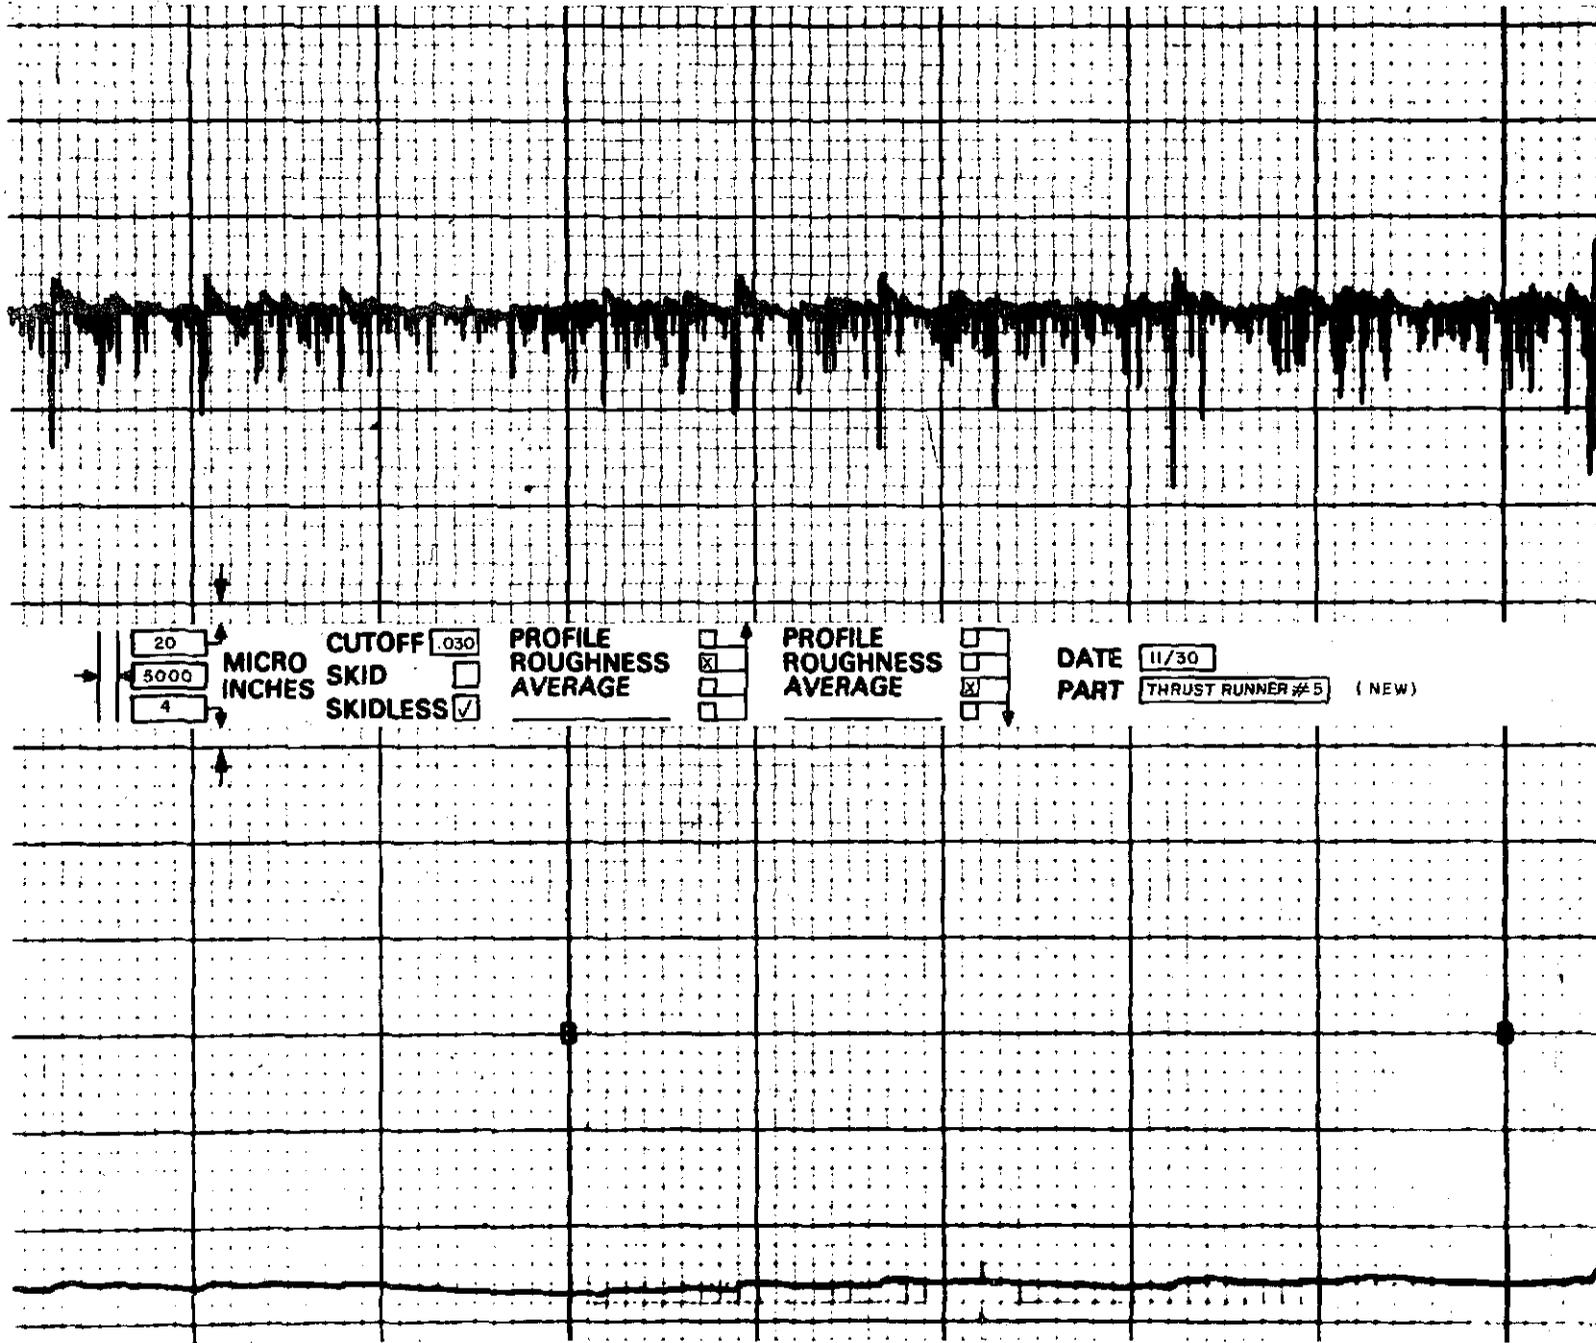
Surface Finish Thrust Bearing #5 (New)
